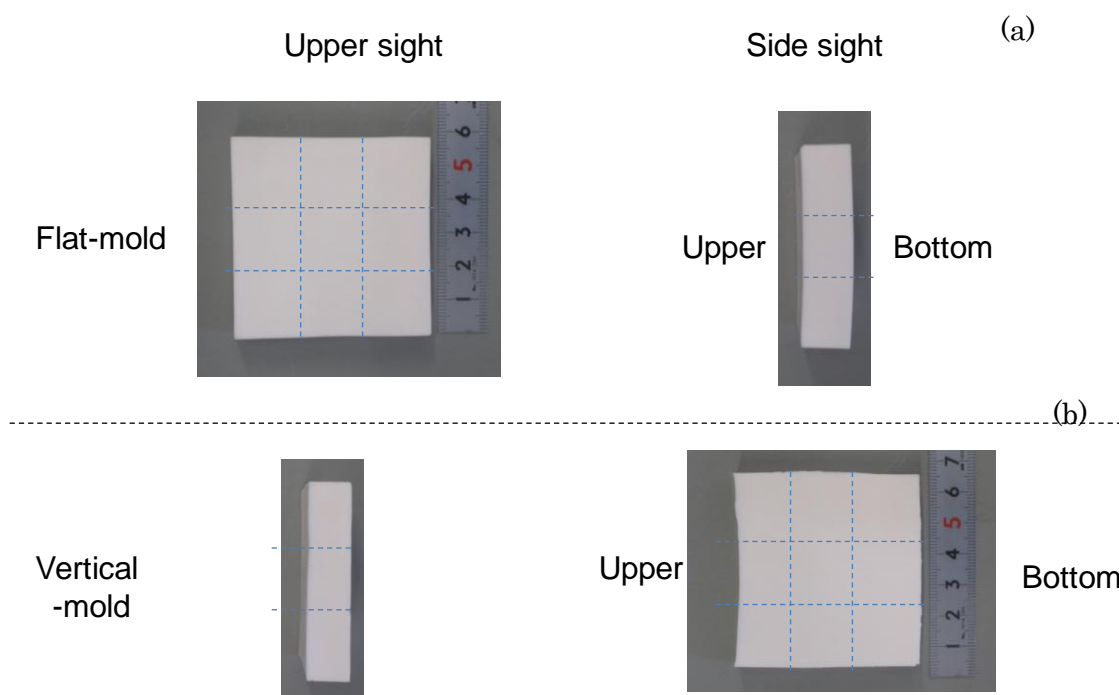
Picture of sintered body , which fabricated from (a) Flat-mold and (b) Vertical-mold.
